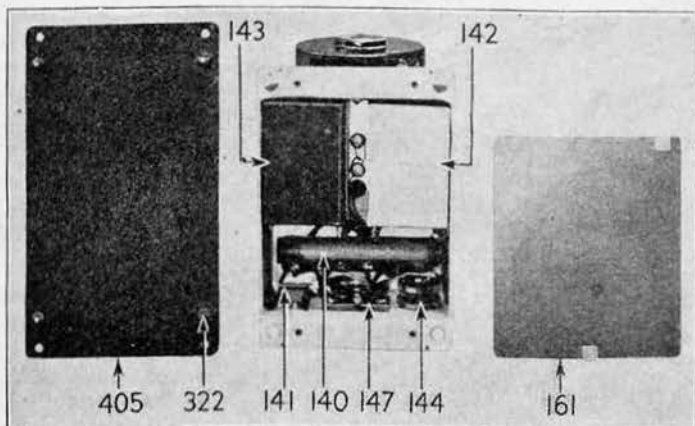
Dynamotor unit, type BD-AA-69, and mounting, type FT-102, bottom view.
